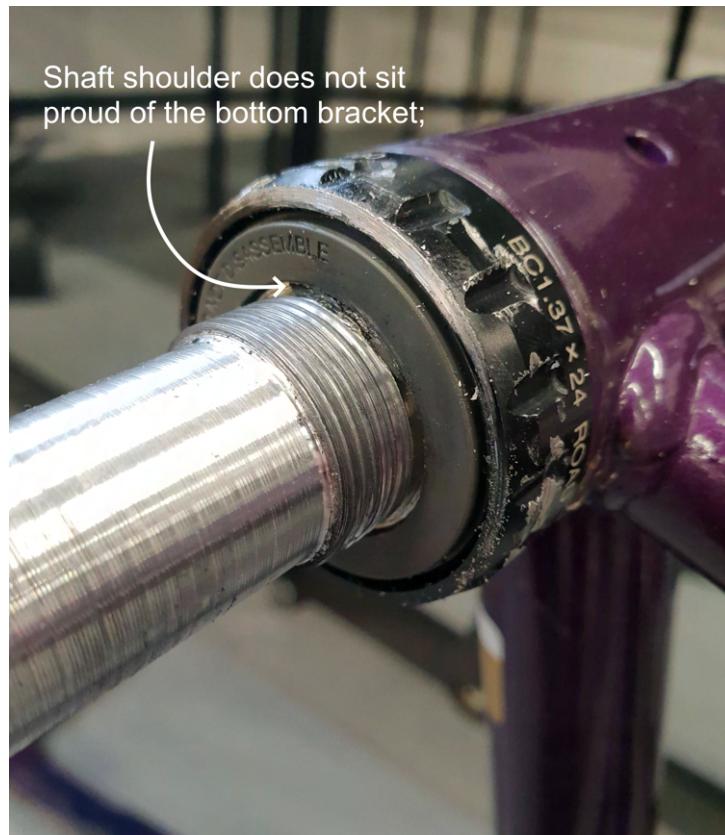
Damage caused to the bottom bracket by the first pass testing;
